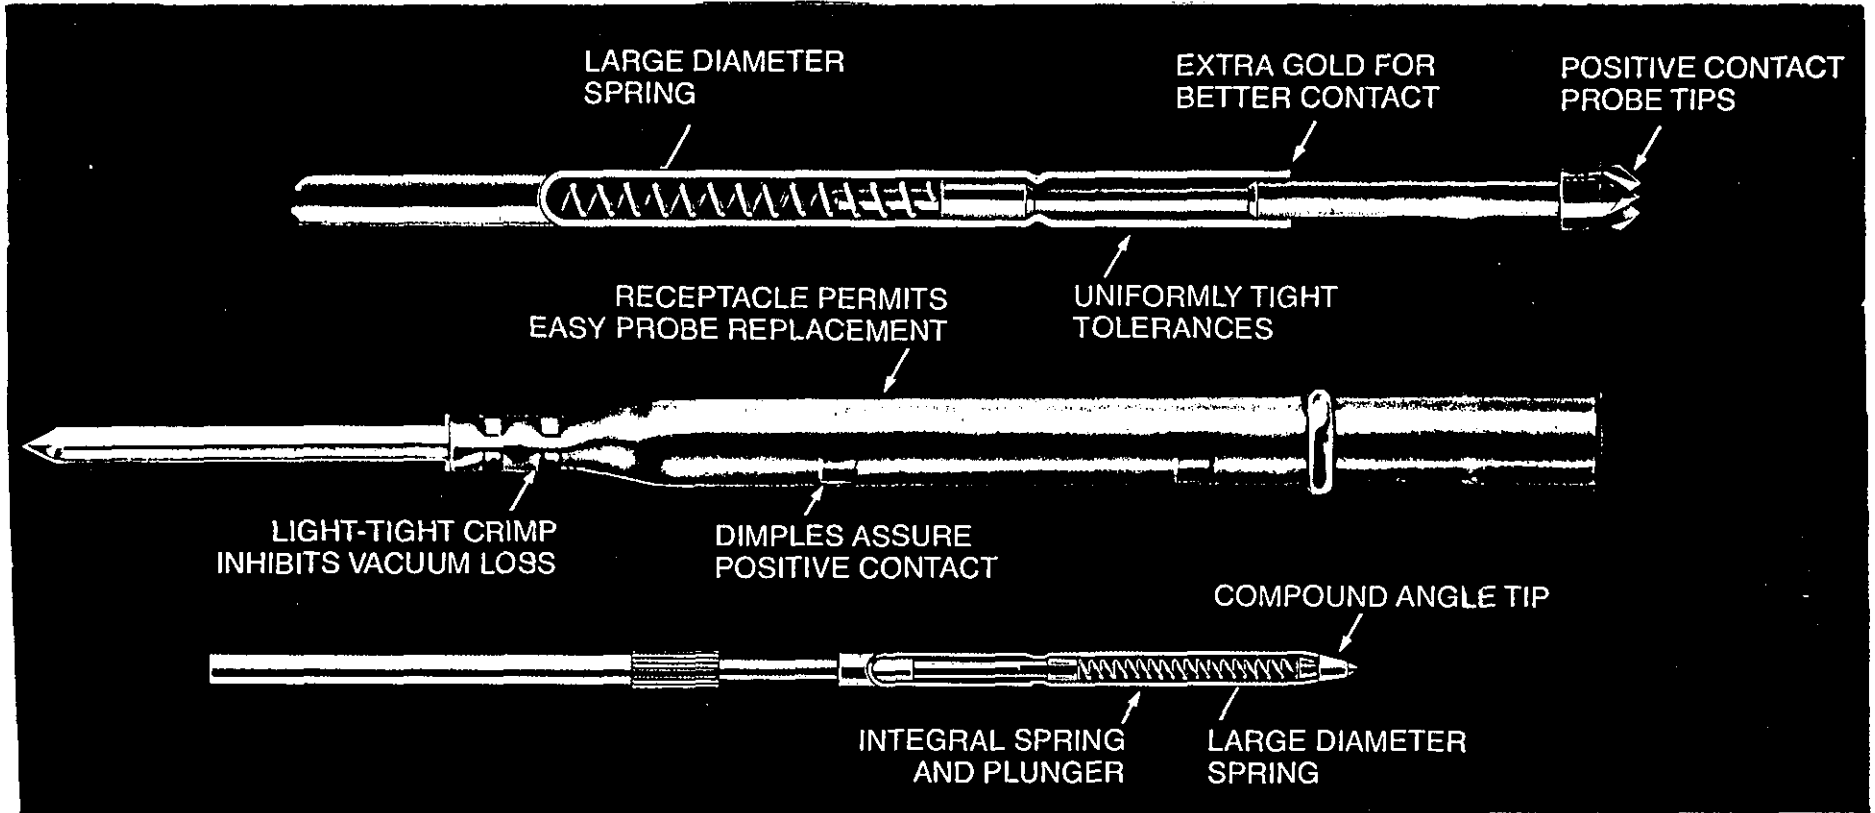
COMPONENT DIAGRAM OF PROBE ASSEMBLY.
